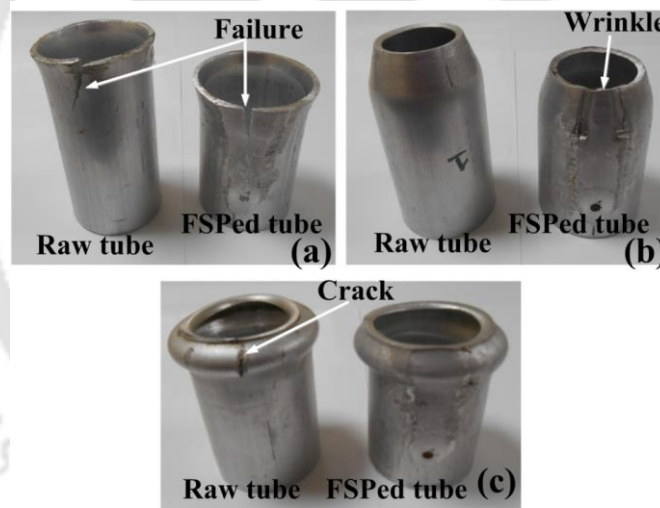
Comparison of end forming behaviour of, (a) tube expansion, (b) tube reduction, (c) tube beading, between unprocessed tube (left) and FSPed tube (right)
